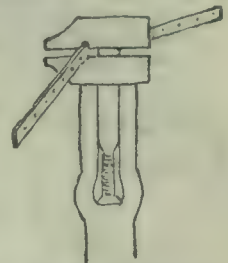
Screw wrench with $\frac{1}{2}$ in. by $\frac{3}{4}$ in. slots cut in jaws, holding a strip of splinting.
